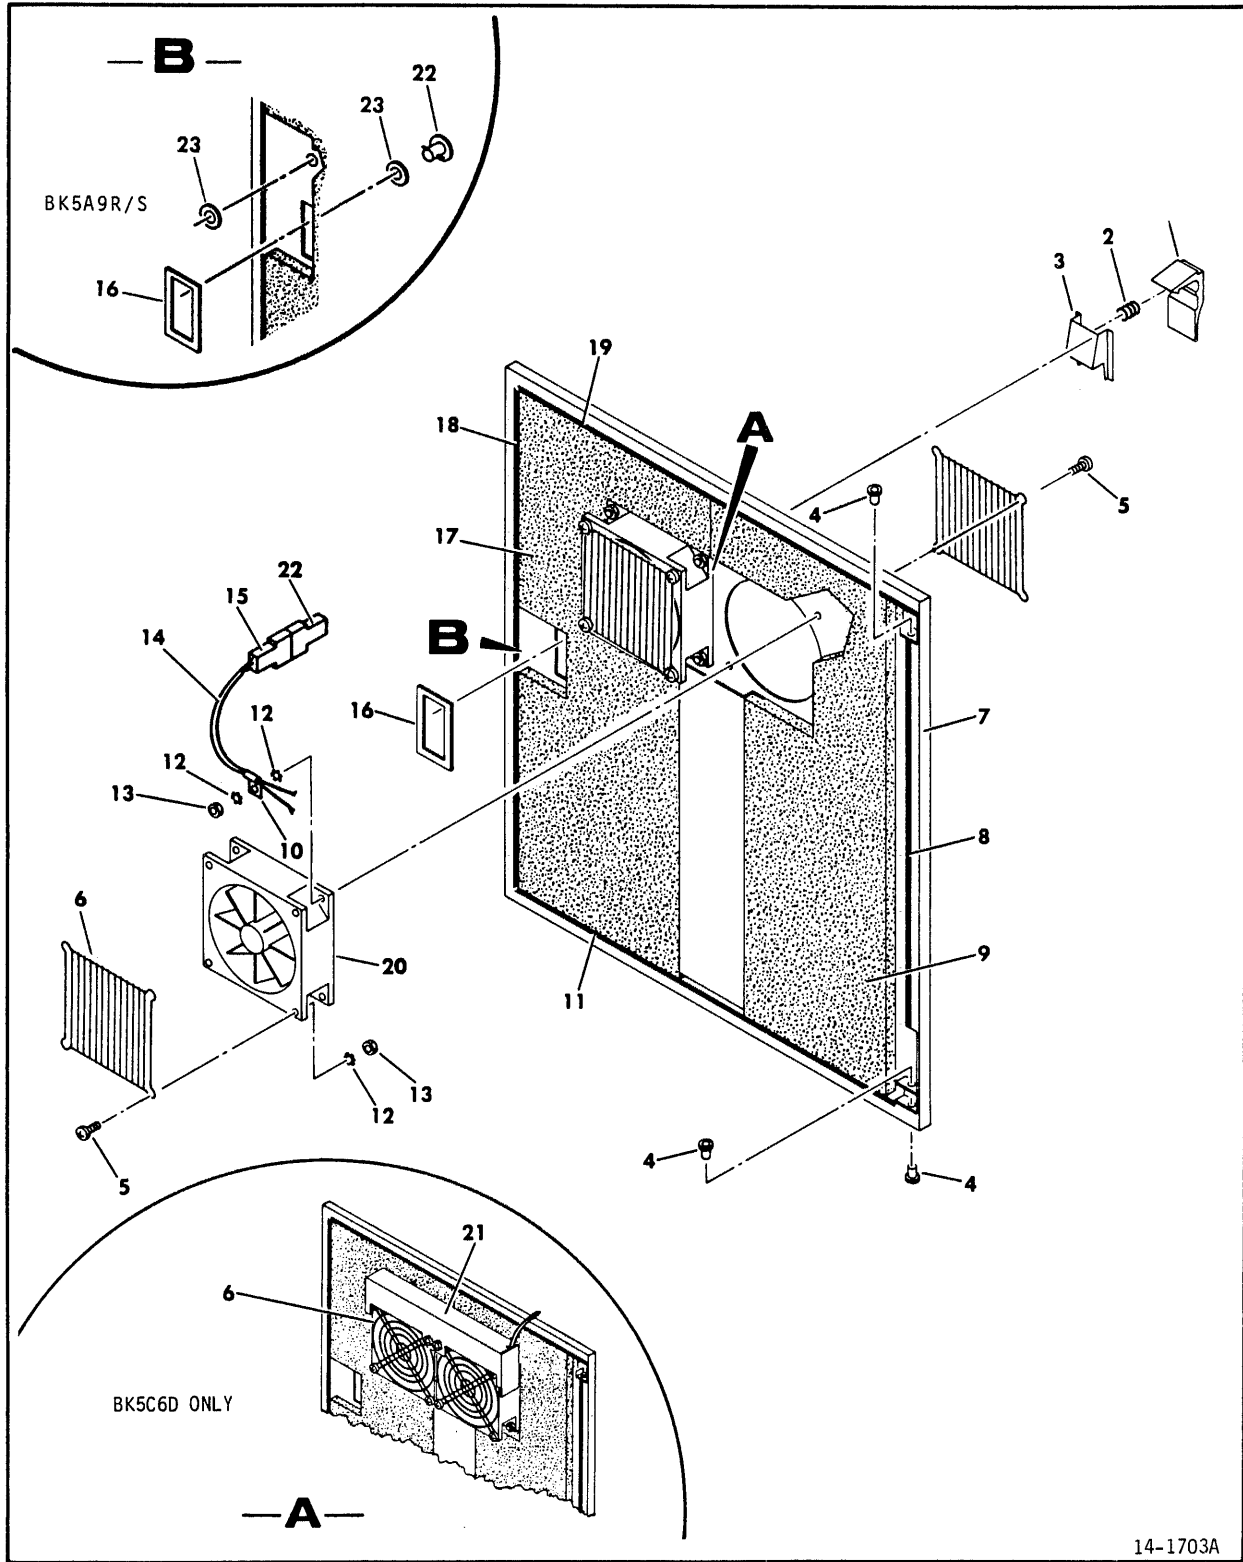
Rear Door Assembly - Acoustic Cabinet
